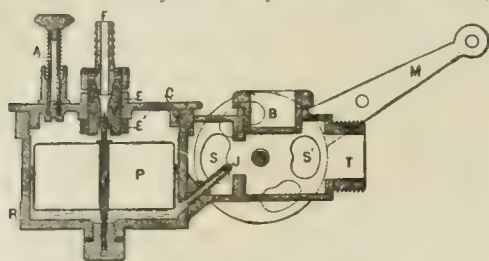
SIMPLE MODERN CARBURETTER, WITH AUTOMATIC ADJUSTMENT ACCORDING TO THROTTLE OPENING.
